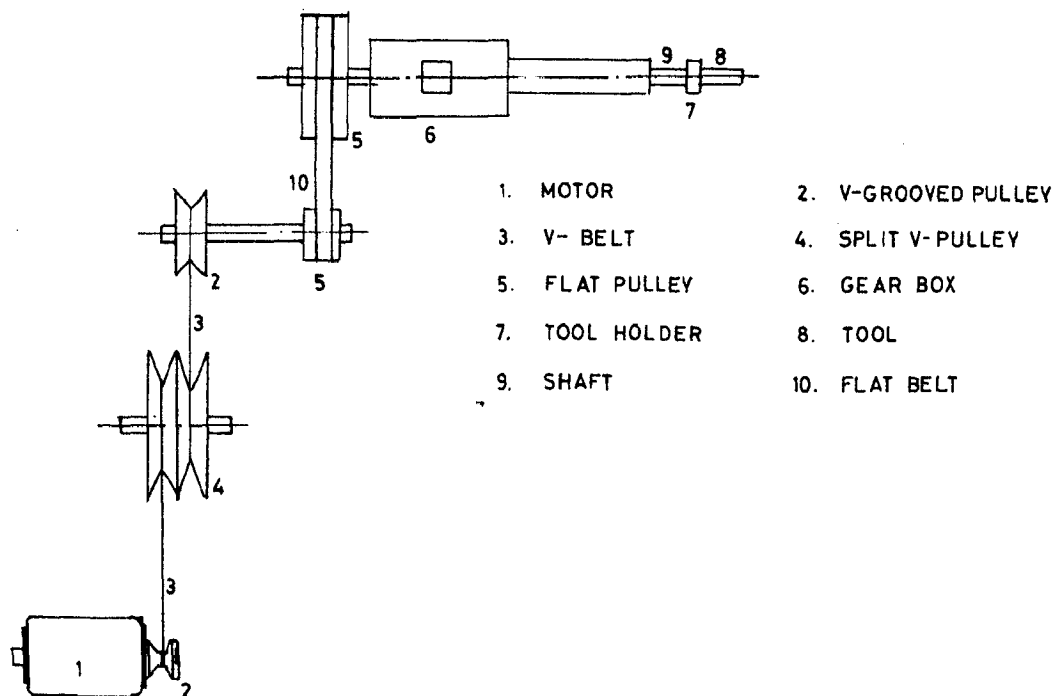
KINEMATIC SCHEME OF FEED DRIVE
